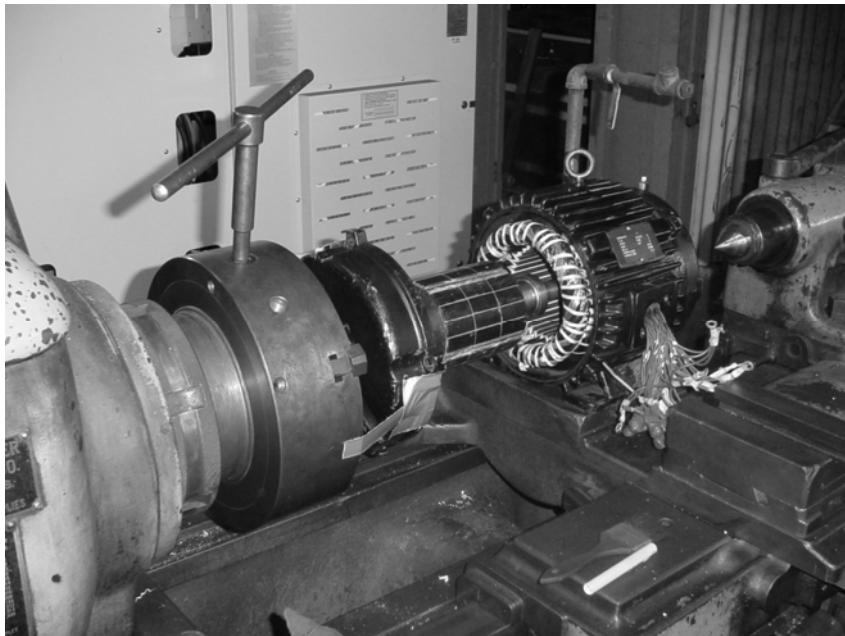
Rotor and stator of the 5BPM during assembly.
